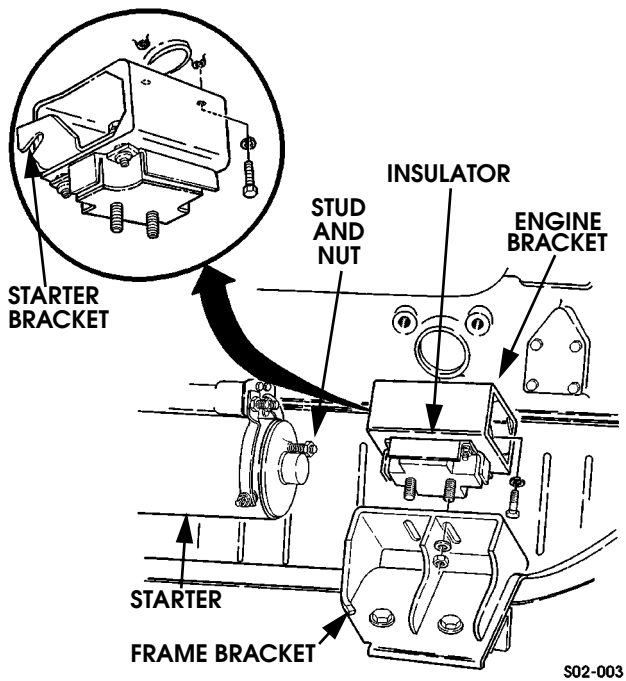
Engine Mounting Bracket and Insulator (Driver Side)
